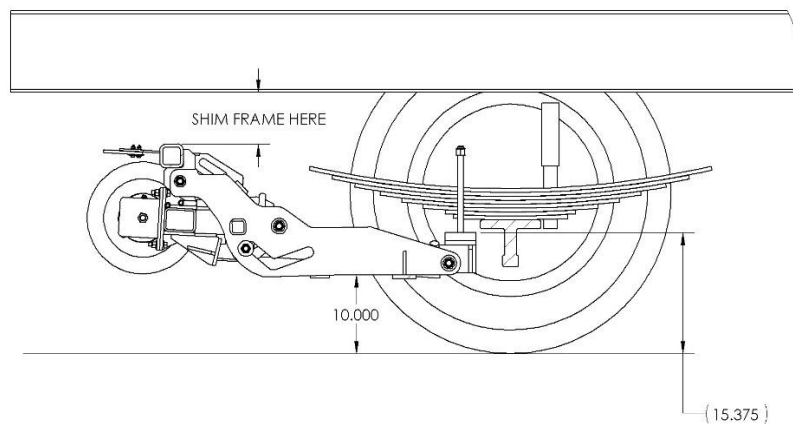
Cam at 10" and parallel to the ground and spring hangers set 1" in front of the axle. In this figure the mounting beam is oriented towards the front of the chassis.
